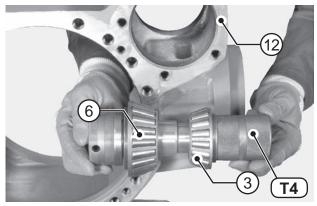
CALCULATING PINION BEARINGS ROLLING TORQUE
